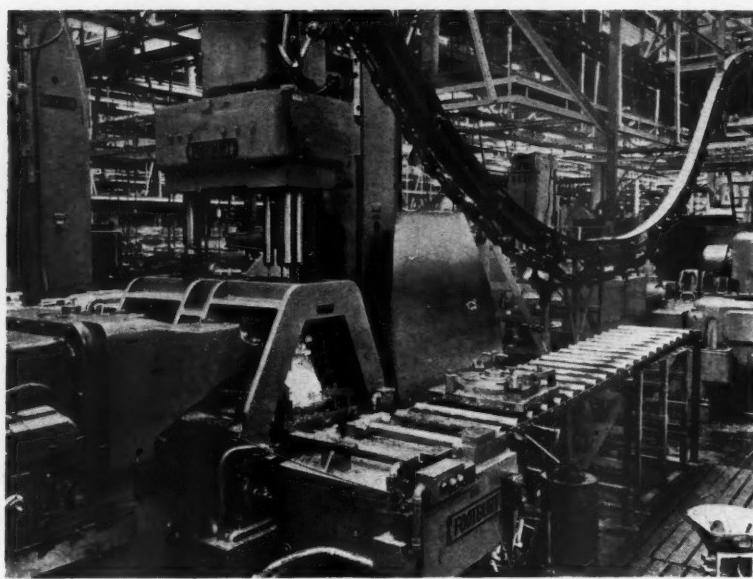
Loading conveyor for the 21-station Footburt transfer machine. Part of the overhead conveyor for the return of jig plates is also shown
